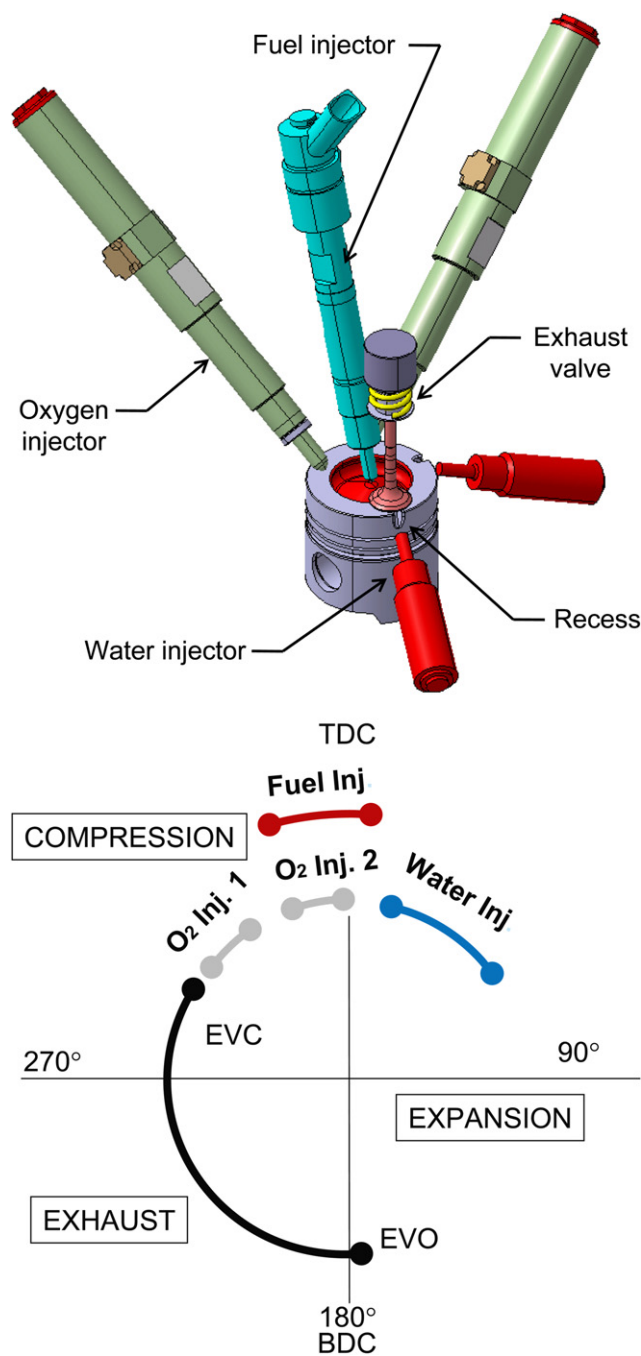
Combustion chamber layout and full load operating principles of the oxy-fuel engine concept proposed in [5].
